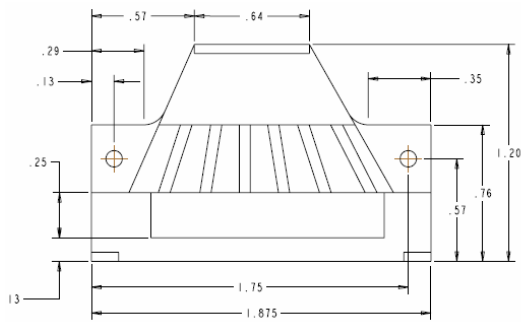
H.1: Old version of wire stop sleeve; crimper.
